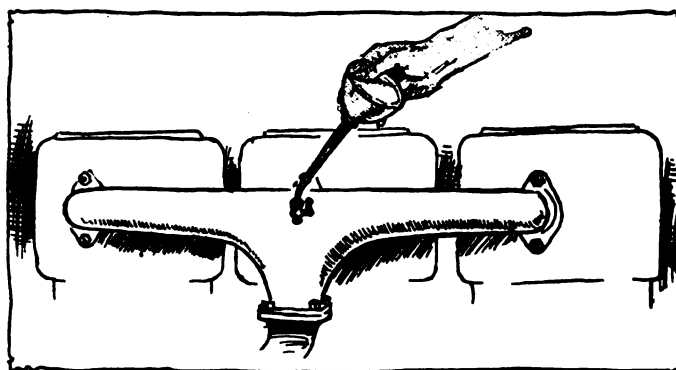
Petcock on manifold for injecting kerosene to remove carbon
